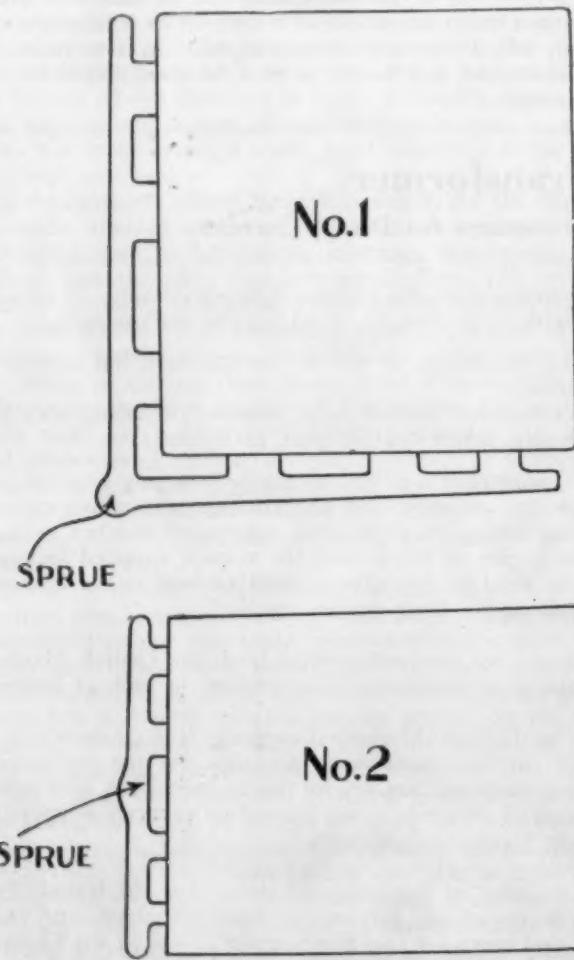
GATING ALUMINUM RUNNING BOARDS
